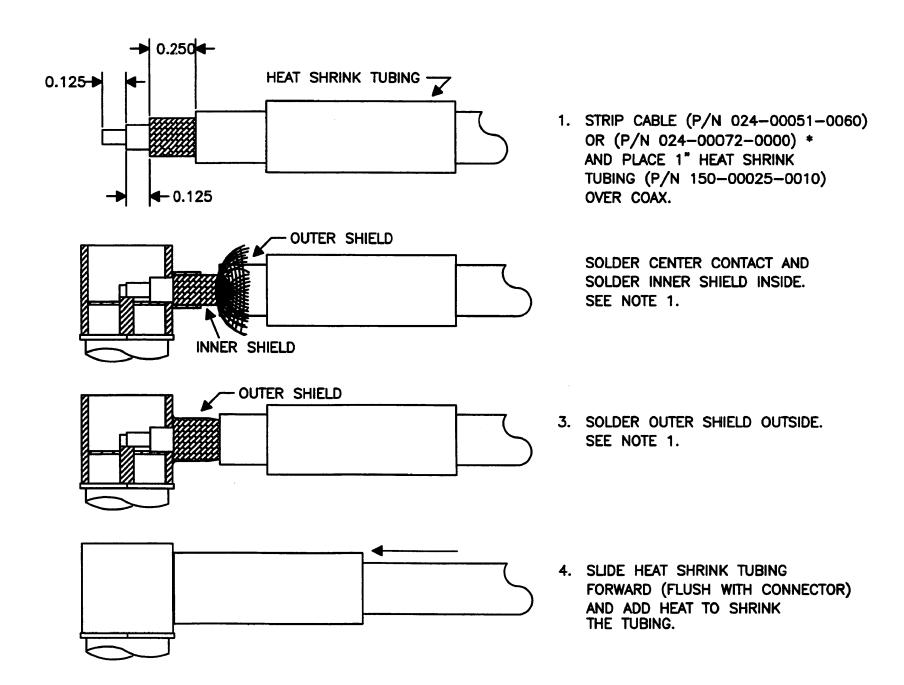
KXP 2290 INTERCONNECTION DRAWING (Dwg. 155-0xxxx-000x Rev. -, Sheet 2 of 2)
